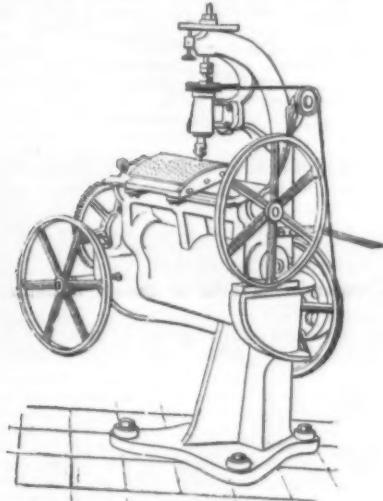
TRIMMING MACHINE WITH REVOLVING CUTTER.
